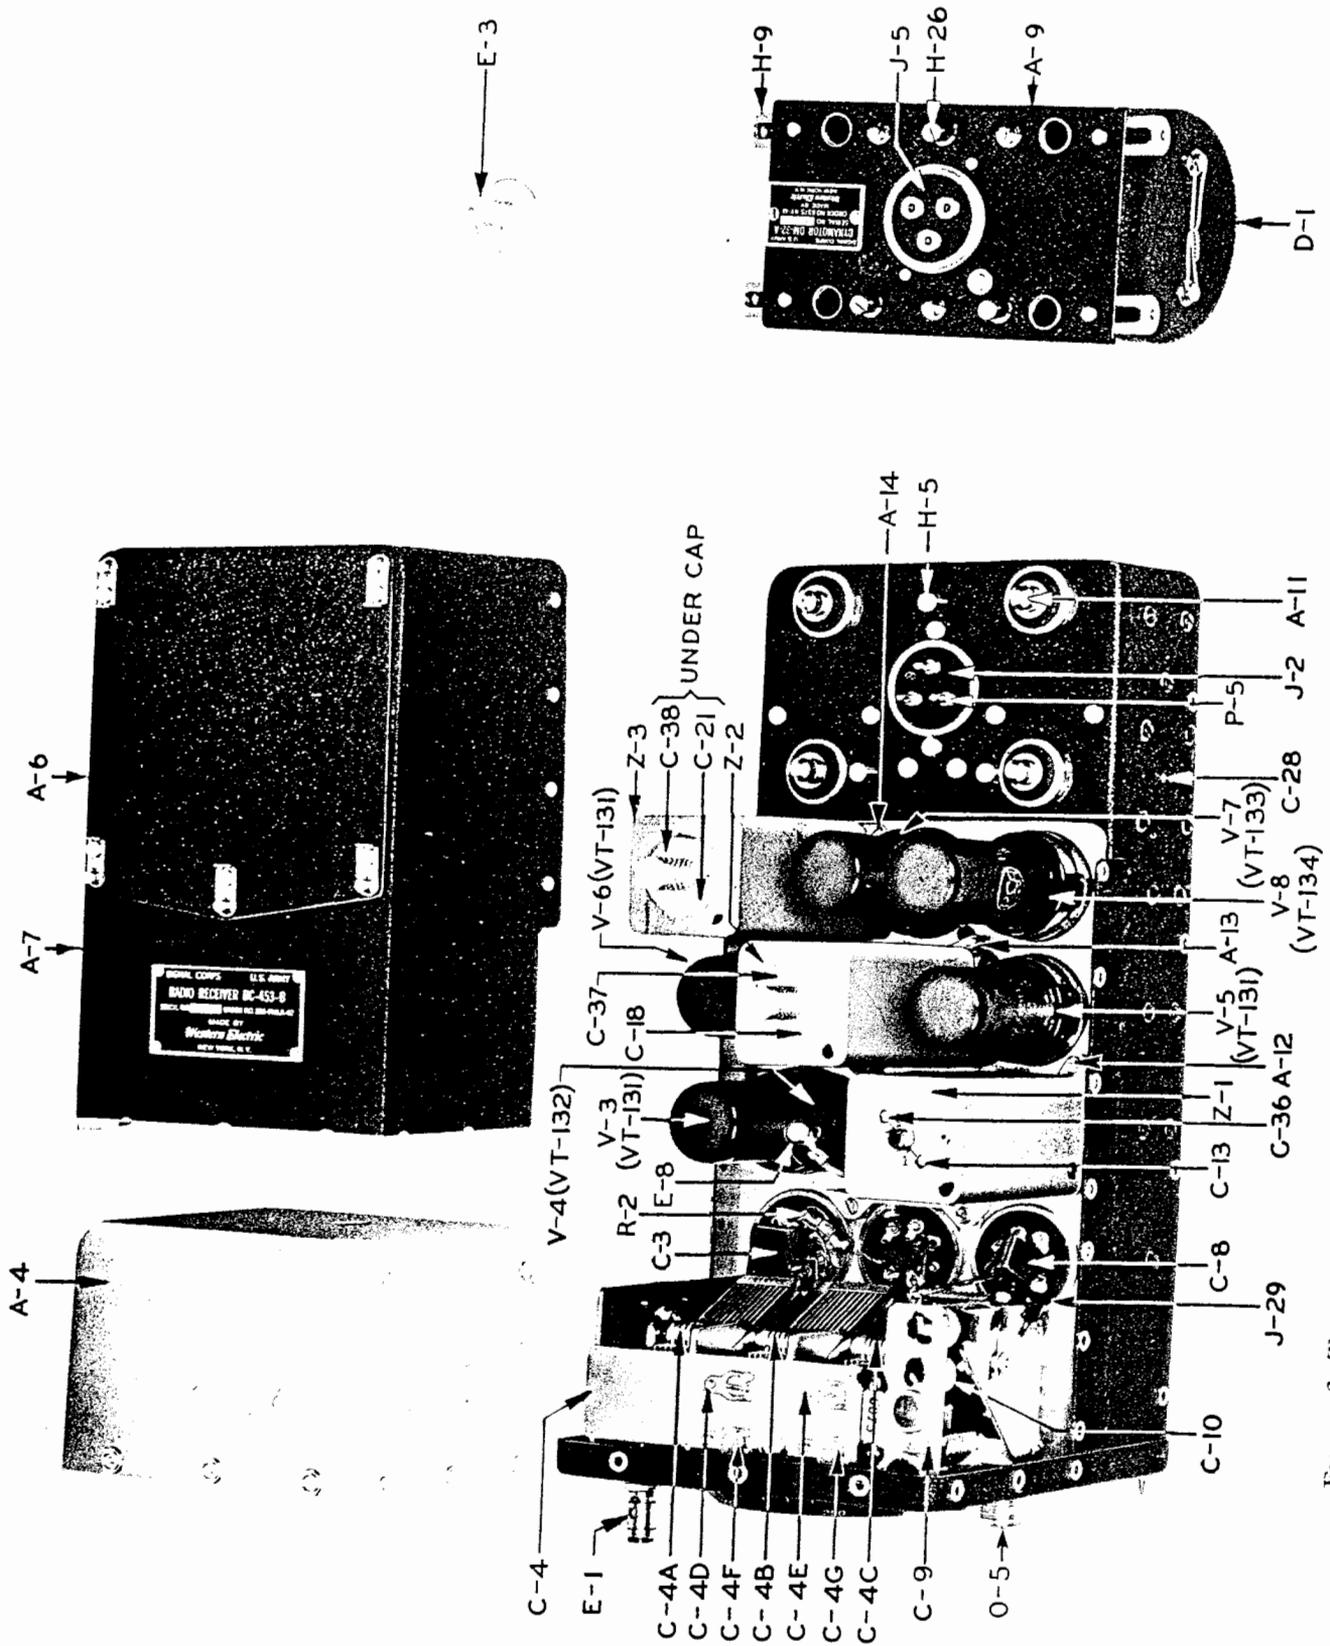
TYPICAL RADIO RECEIVER, TOP INSIDE VIEW, AND BOTTOM VIEW OF DYNAMOTOR DM-32-A
